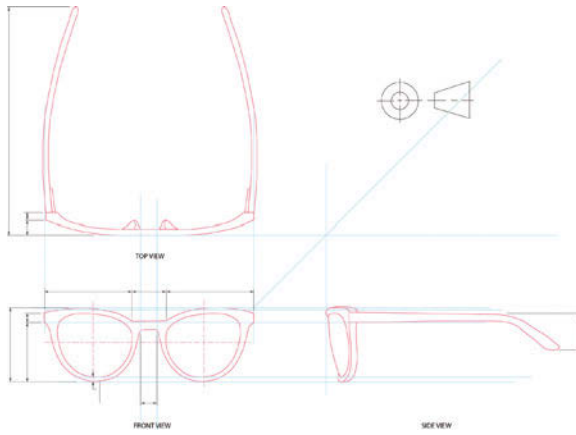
Orthogonal drawing of glasses including the potential placement of dimension lines. These dimension lines include the height, width and length. The drawing was created using the 45° drafting method.
